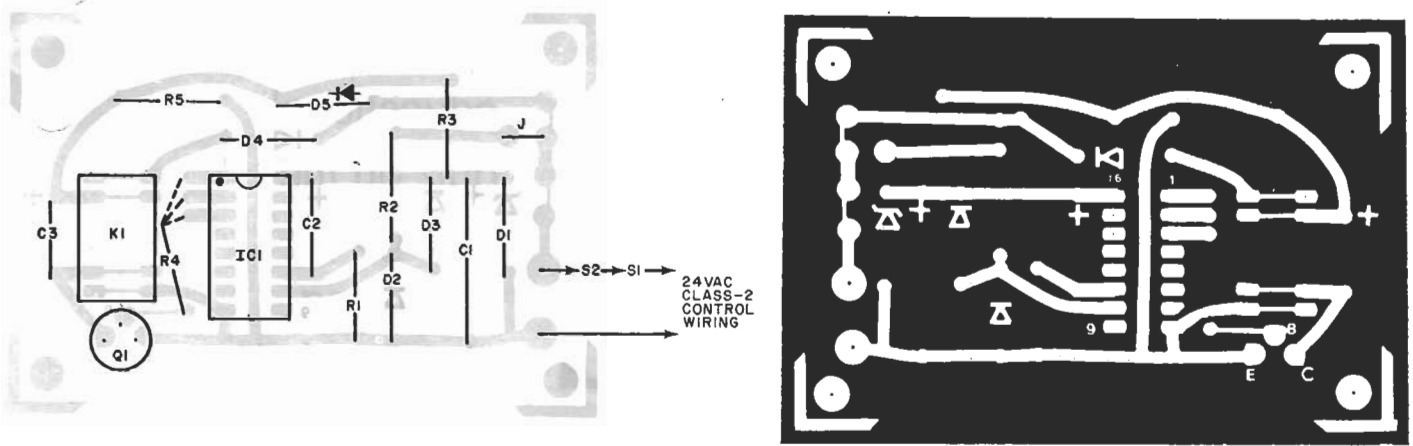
Etching and drilling and parts placement guides for a suitable pc board.
